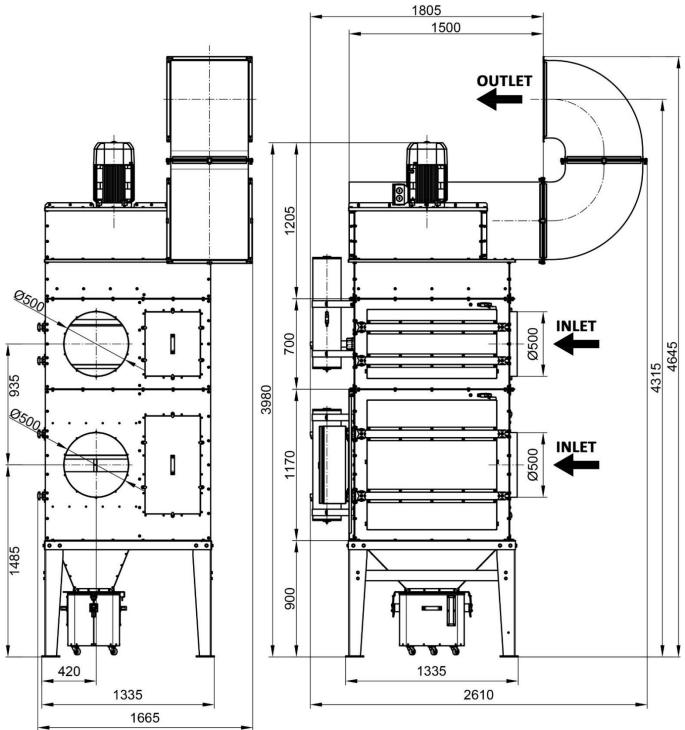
UFO-A-15000 RH – (air inlet on the right) – Dimensions
